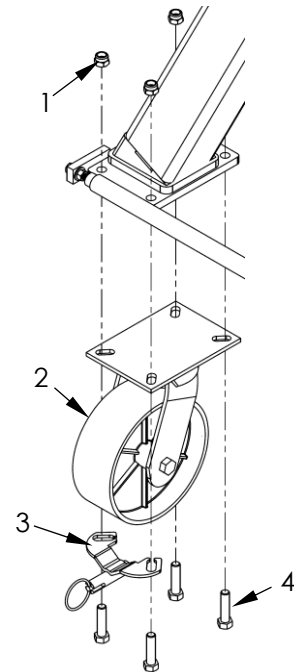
C: Caster attachment (FHSN-4; FHSN-6; & FHSN-8 models)
